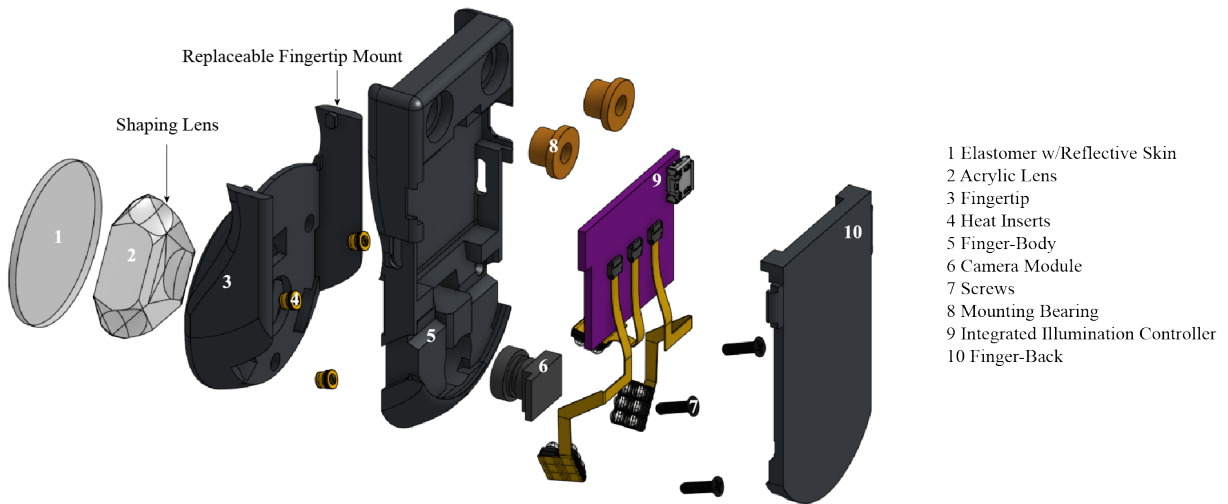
Exploded diagram of the GelSlim 3.0 tactile finger and its 10 components
